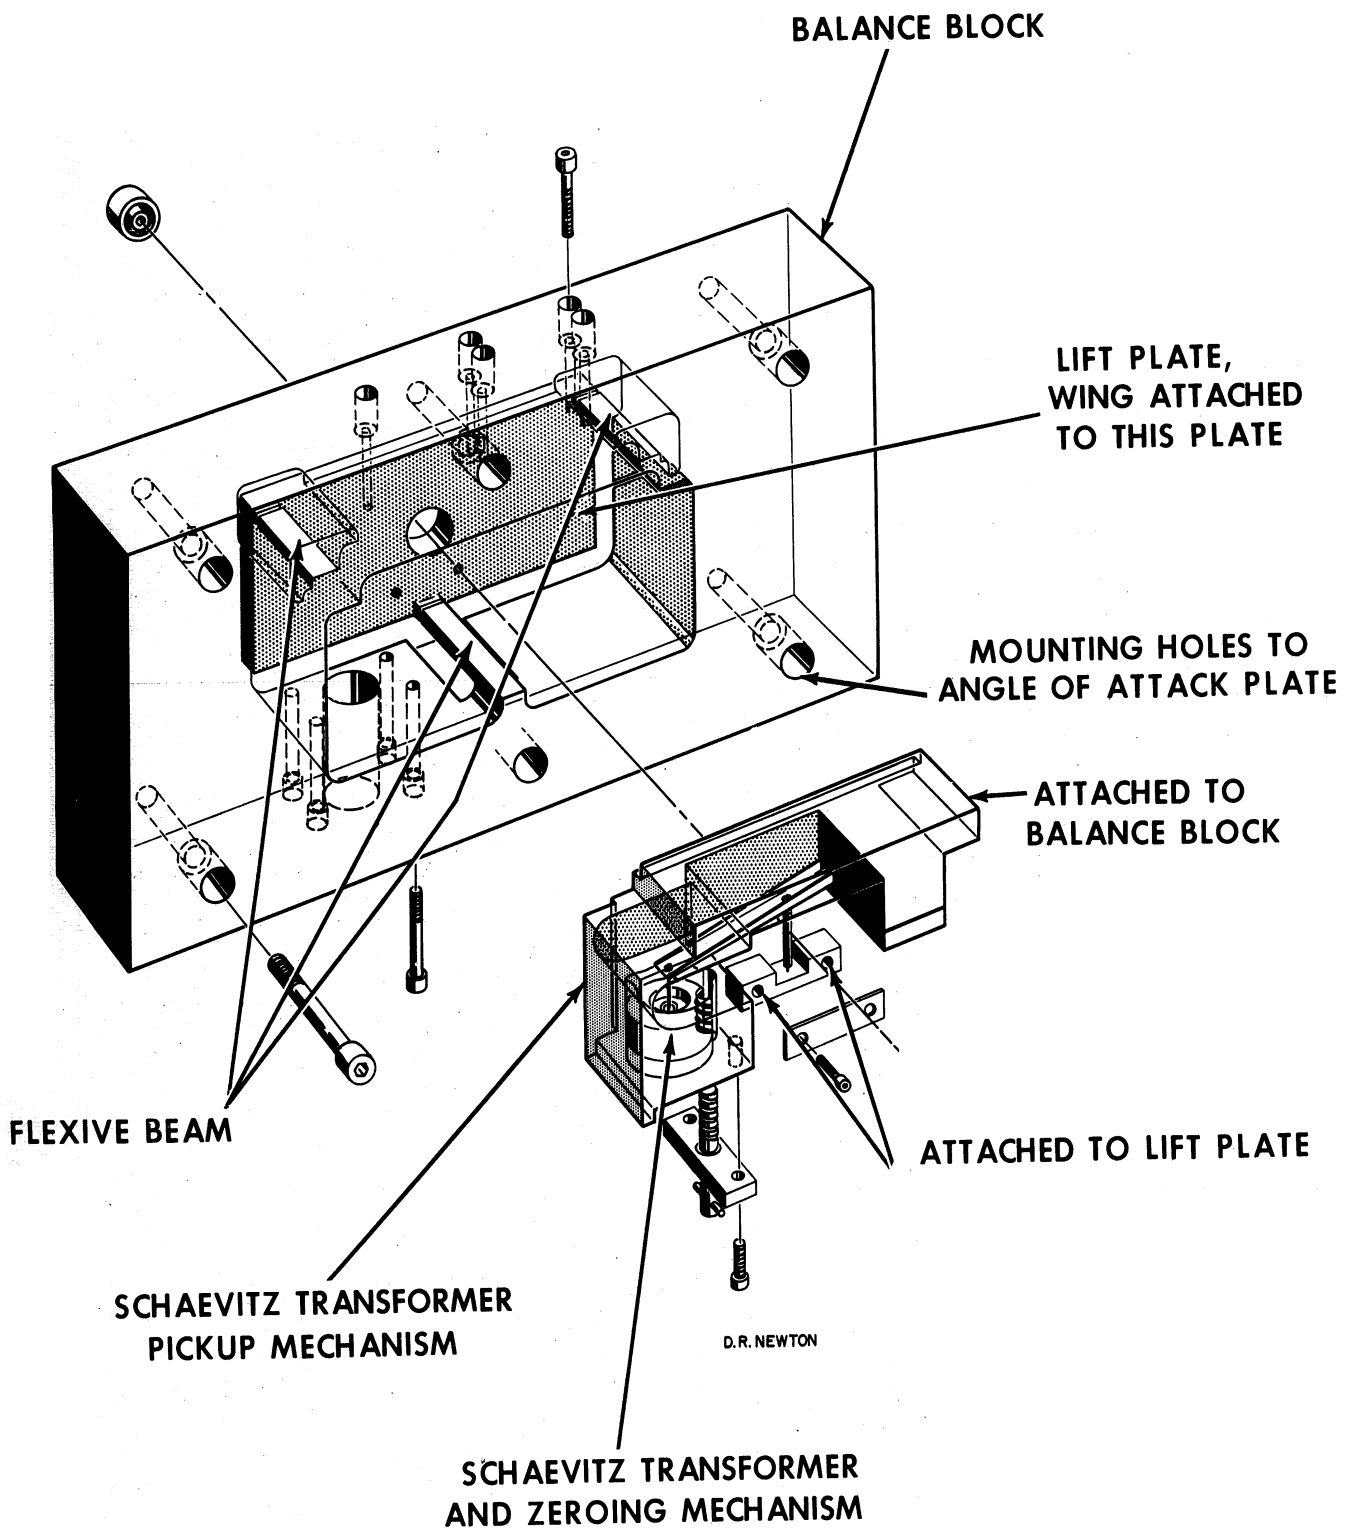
View showing flexure-beam block and Schaevitz Transformer mounting.
